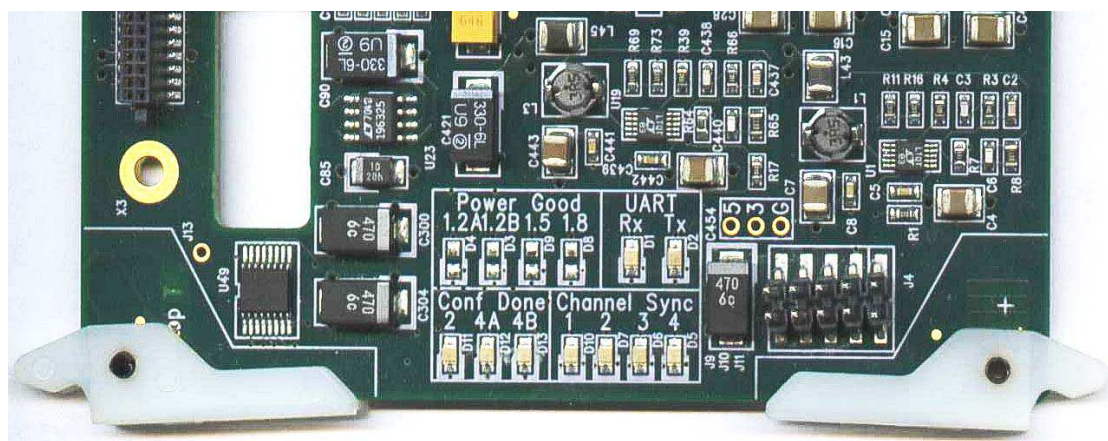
Predator II GX VID4 Processor Module (Front Edge)
